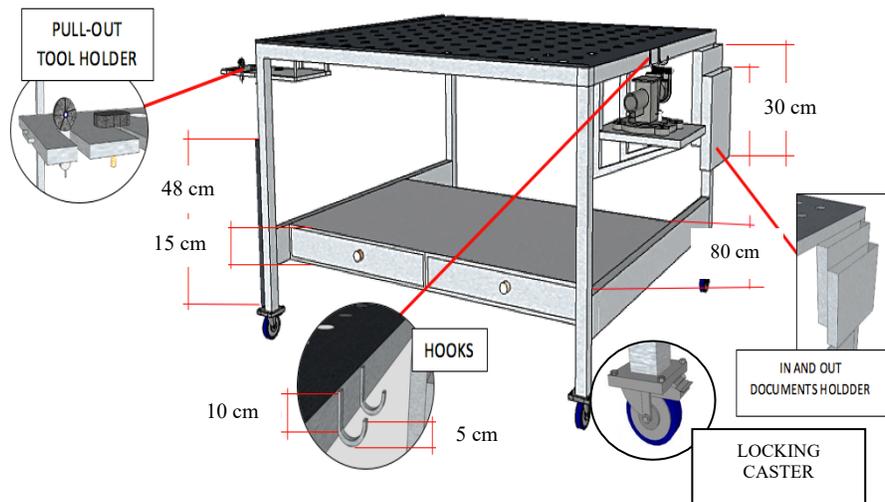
Proposed Large Kitchen Equipment Assembly Workstation Details
